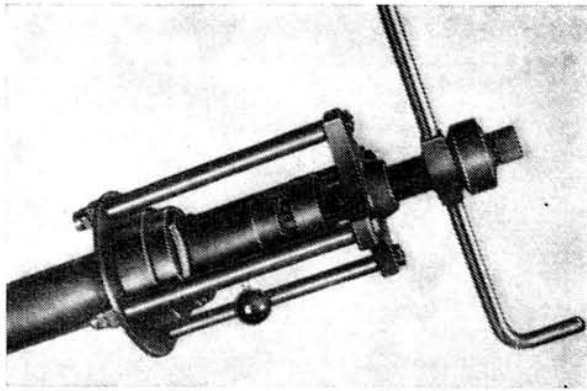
/5 - Pressing Ball Bearing on Shaft Using MP 5-112 Jig and Its Liner (smaller)
